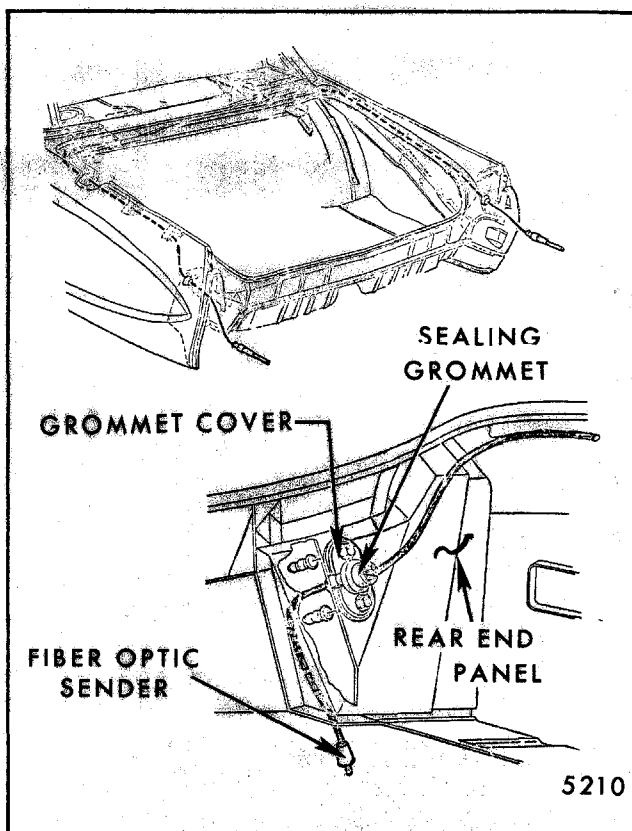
Fiber Optic Routing - Cadillac "C and E" and Buick "C" Styles
